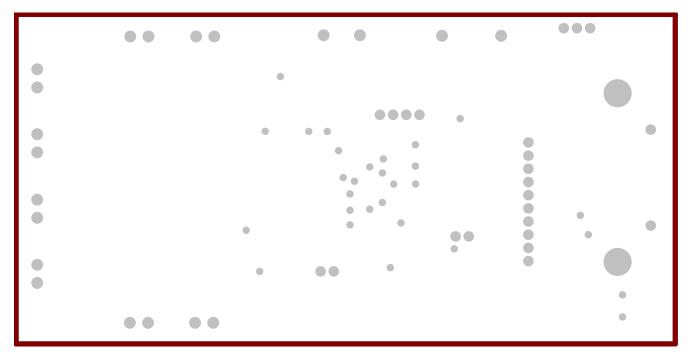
PCB Layout (internal AVSS/GND plane 2) for the ADS131E08EVM
